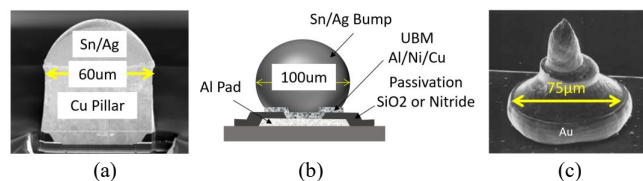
Bumps technologies: (a) Cu pillar, (b) solder bump, (c) stud bump.
